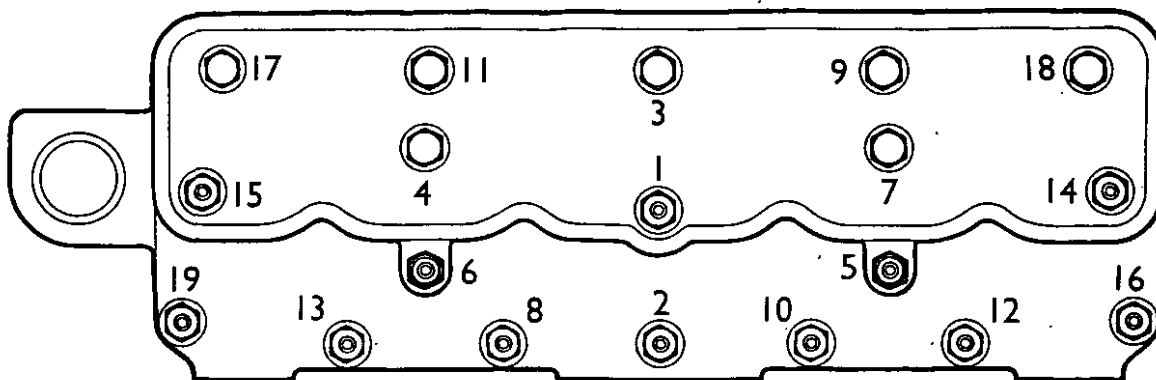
CYLINDER HEAD TIGHTENING SEQUENCE
